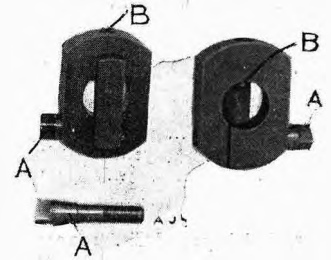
Front and back views of the Electric Ignition Co.'s special adjustable magneto coupling.
